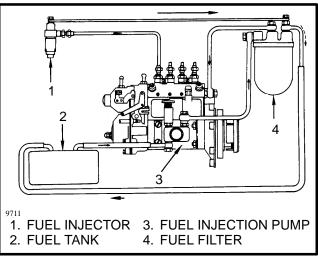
THE FUEL SYSTEM, FUEL INJECTION PUMP, MODEL PE4A
